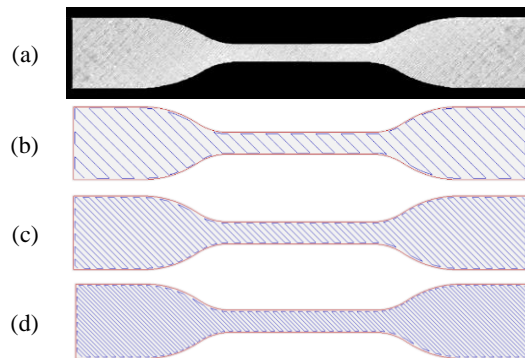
Dumbbell specimen printed with 25% infill (a); print path for 25% infill (b); print path for 50% infill (c); print path for 75% infill (d).
